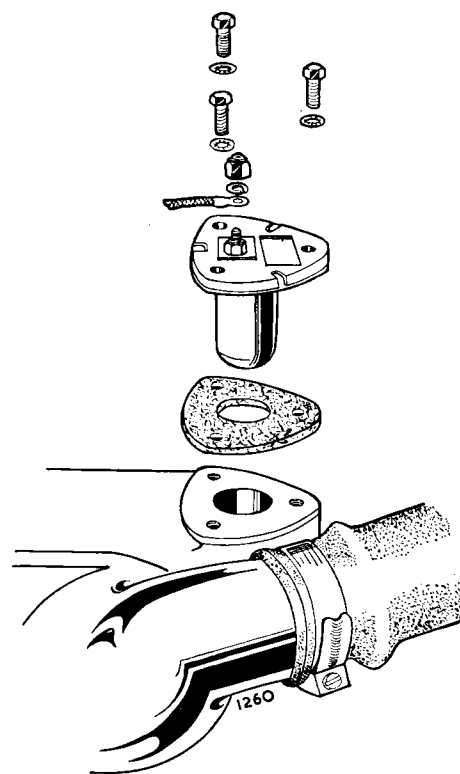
Removal of the auxiliary starting carburetter thermostatic switch
